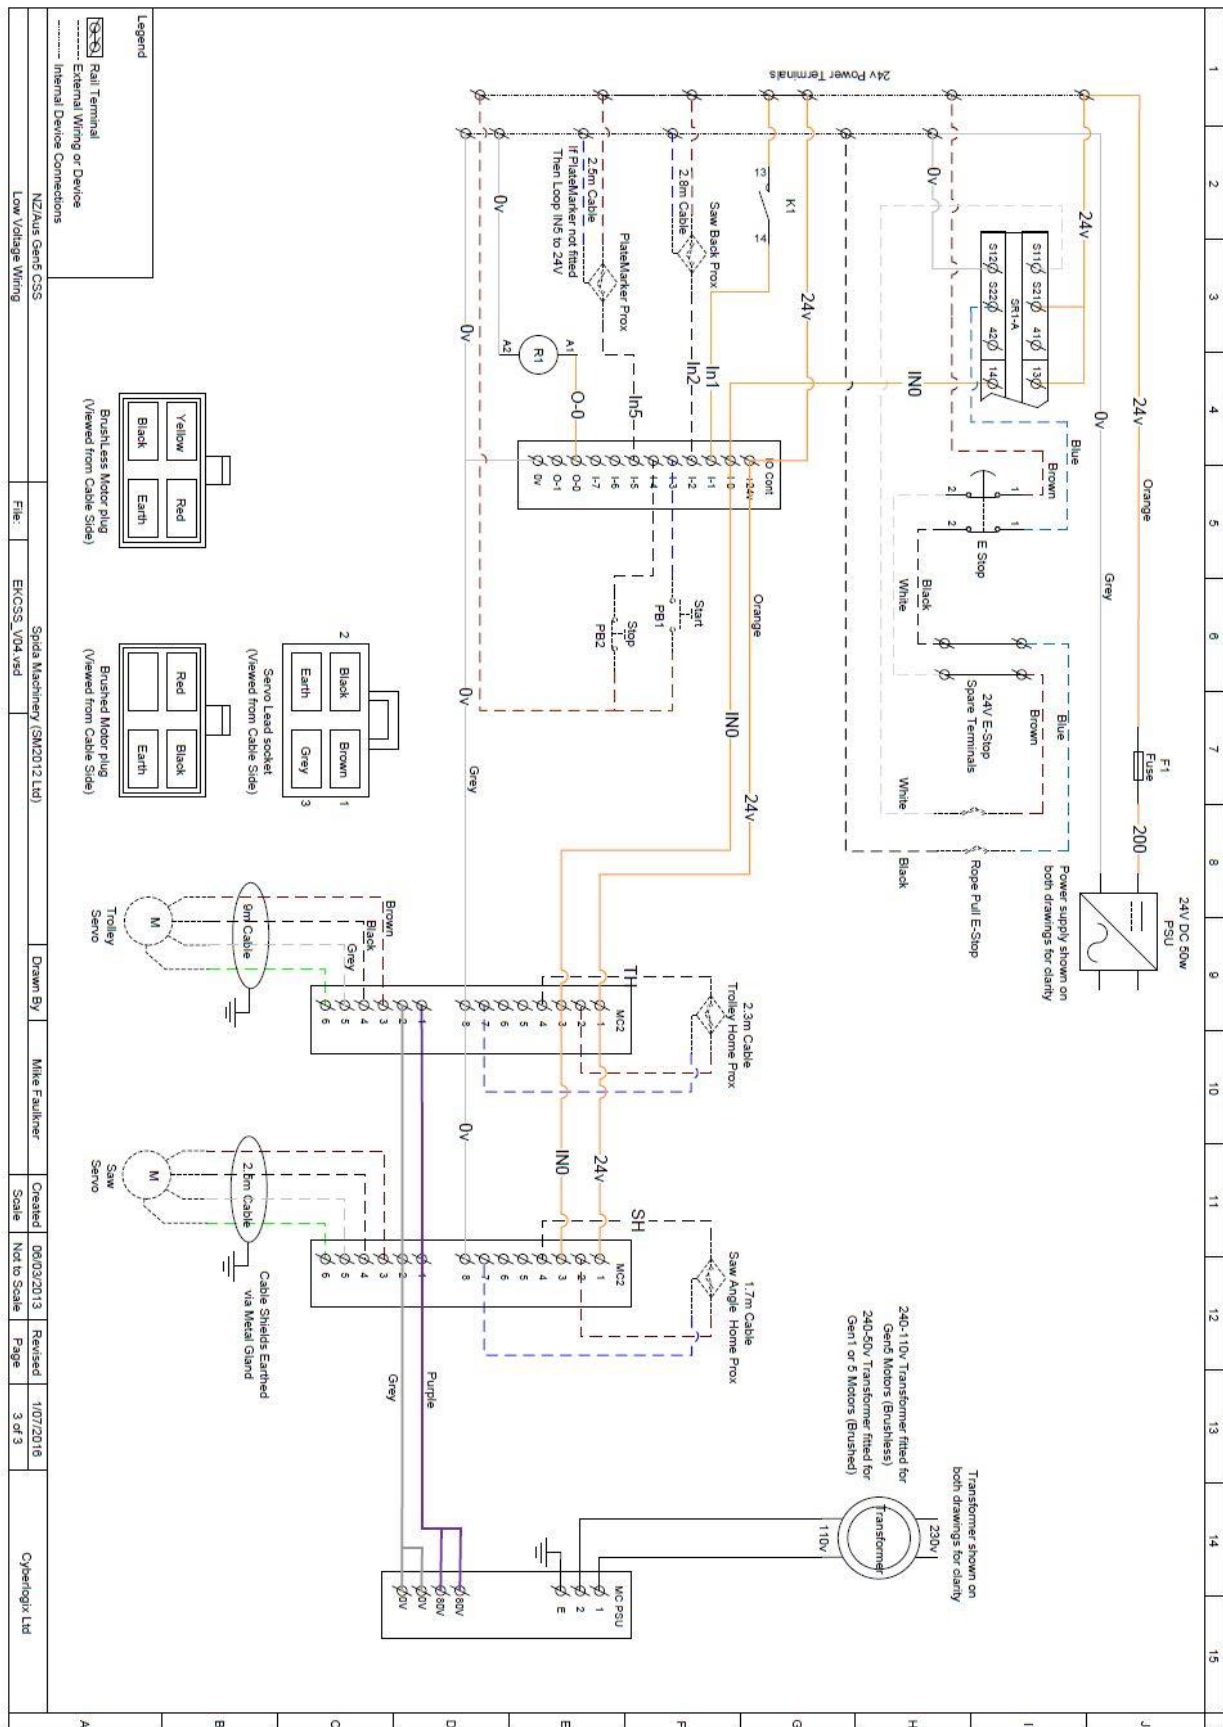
, CSS Vector Saw Electrical Drawings NZ/AU part 3
